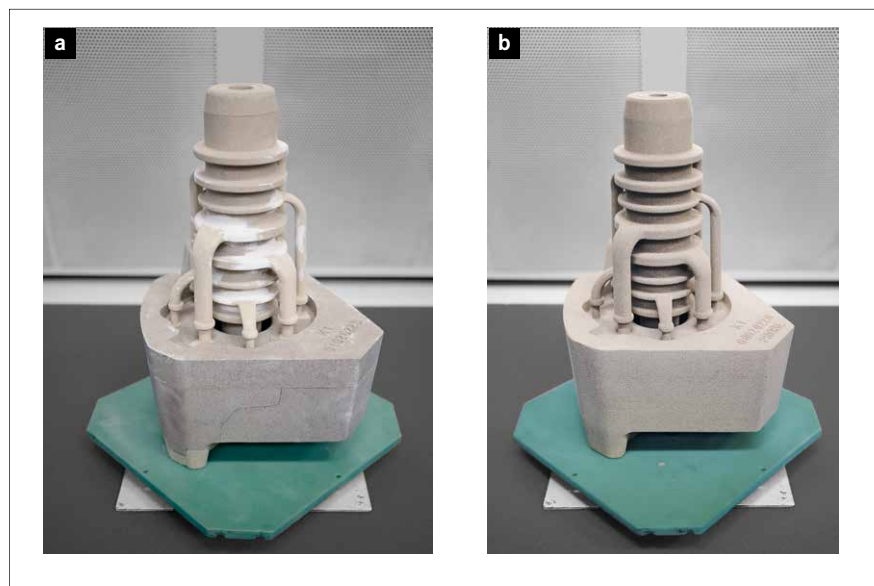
GF Casting Solutions Leipzig's assembled core (left) and 3D printed core in one piece (right).
